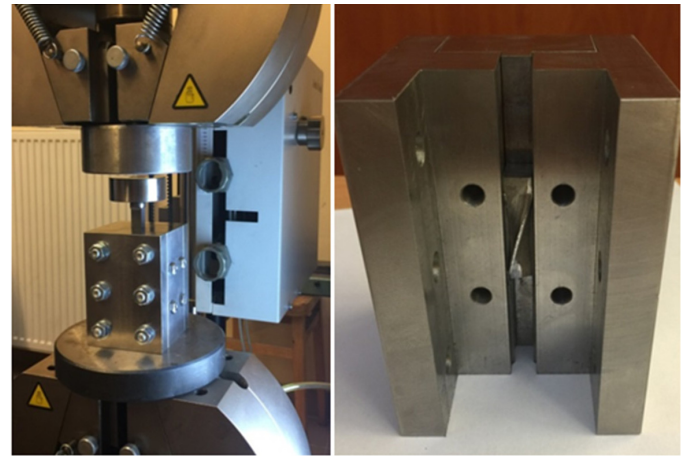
Left – Instron 35 universal tensile test machine with Zwick-Roell measuring system, right – part of the matrix with visible of the channel to the TE test
